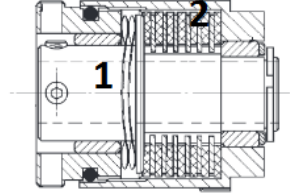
Schematic of Vari-tork 273.25.22 adjustable-friction clutch: (1) inner bearing housing the interconnecting shaft, (2) outer bearing.
